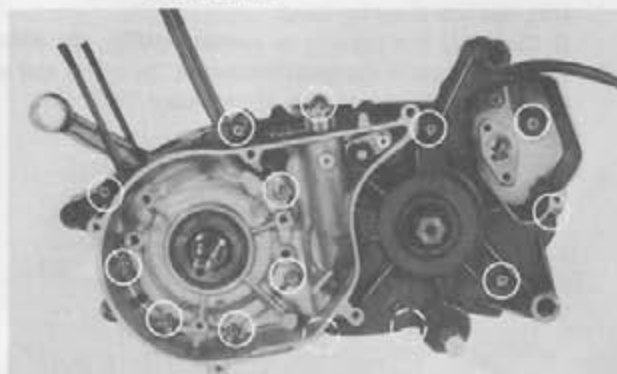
① Crankcase tightening screws (fourteen)
